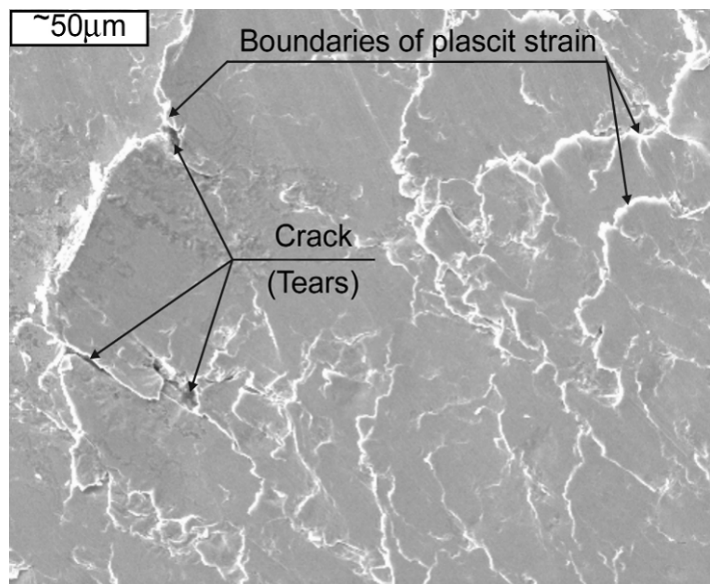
Surface morphology. The cutting conditions used were: $f_z = 0.2$ mm/tooth, $a_p = 0.25$ mm, $f_w = 0.5$ mm, $D_c = 12$ mm, $n = 2500$ rpm, 45 steel workpiece material, 0° angle, out-cut milling; magnification of 300
